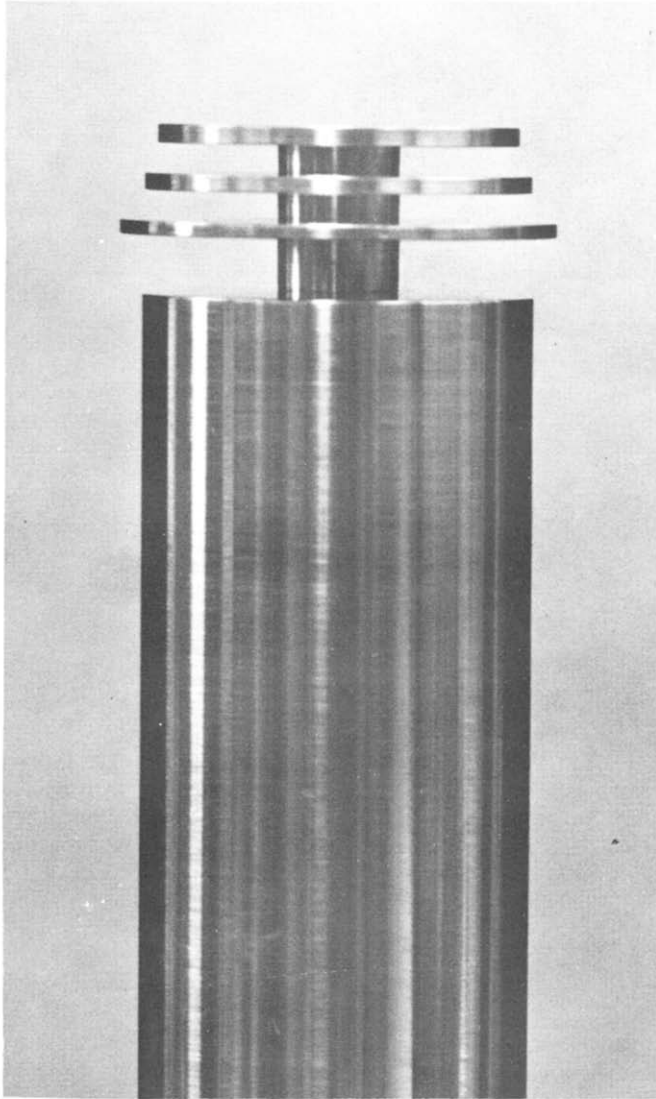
Three-disc fin on a stem mounted on a supporting rod, side view. Dimensions in Table 2.
